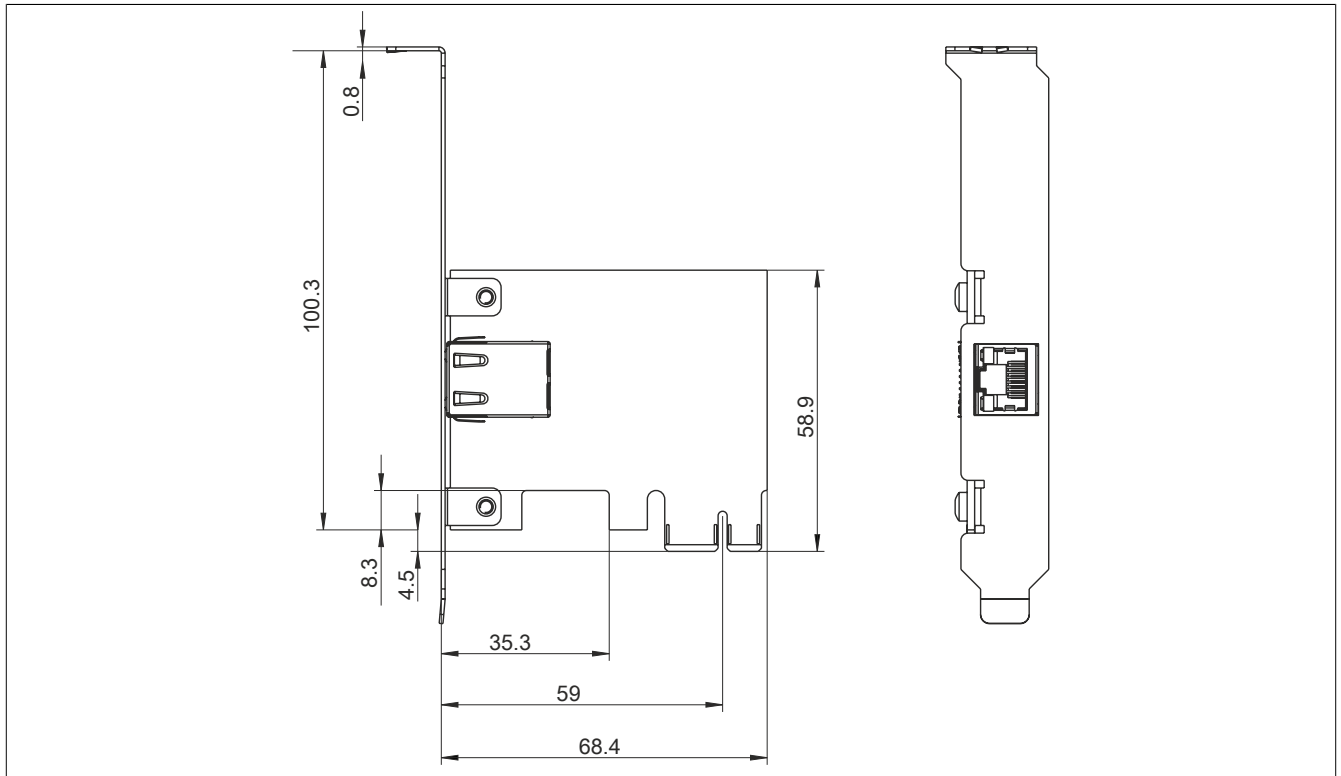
5ACPCE.ETH1-00 - Dimensions
